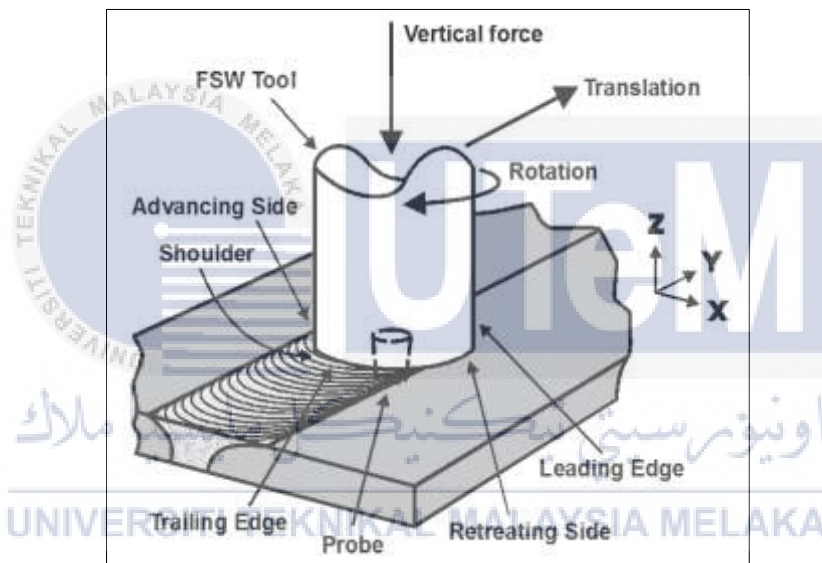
The Dry Friction Stir Welding (FSW) Process is illustrated schematically
